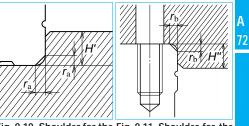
Shoulder for the Fig. 9.11 Shoulder for the rail datum face slide datum face
